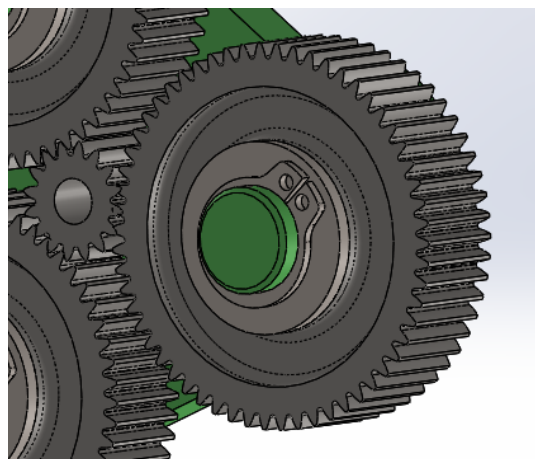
detail of the fixing of the planet gear: the carrier with a single flange is supporting the pin shafts only on one side
